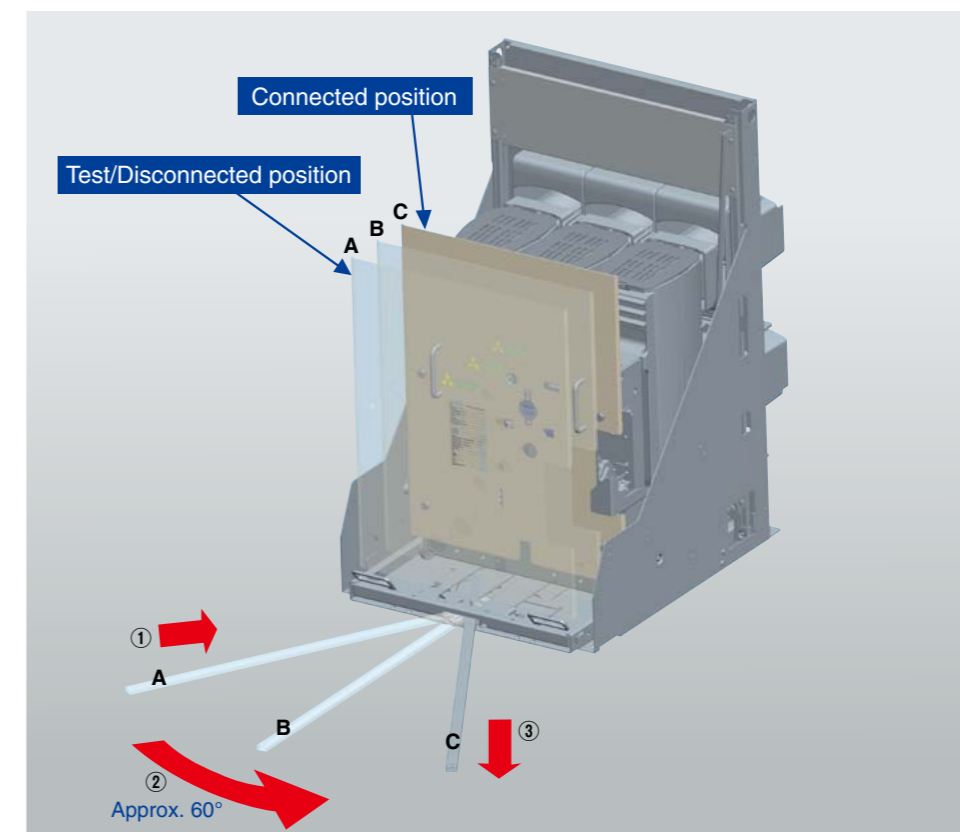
Withdrawable with door closed (Type-M) operation mechanism.
